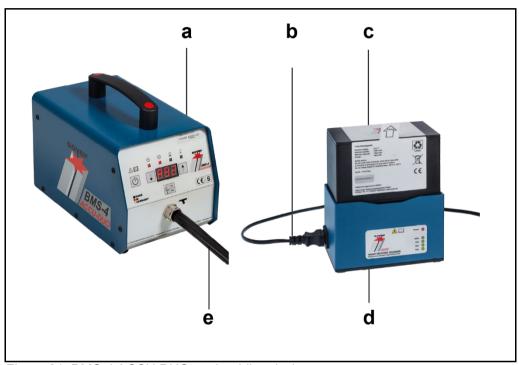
BMS-4 ACCU-DUO stud welding device
